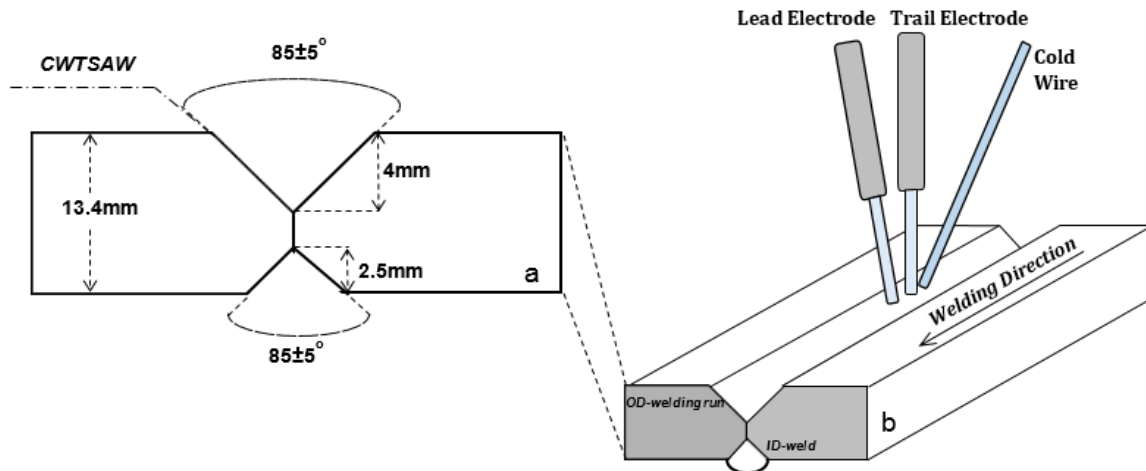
(a) X70 steel joint geometry indicating both ID and OD bevels. (b) Schematic view of CWTSAW process with positioning of the electrodes and cold wire.
